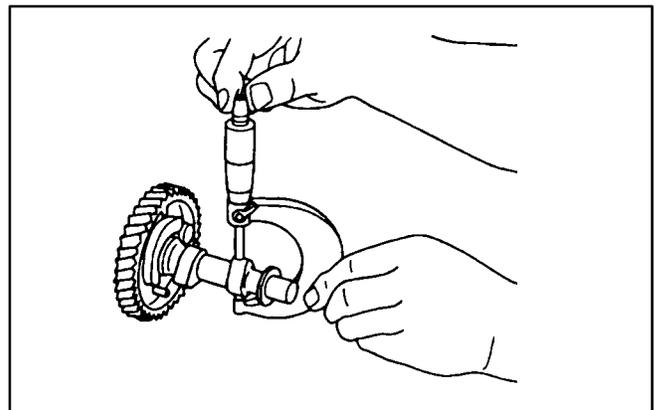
INTAKE AND EXHAUST CAM HEIGHTS
